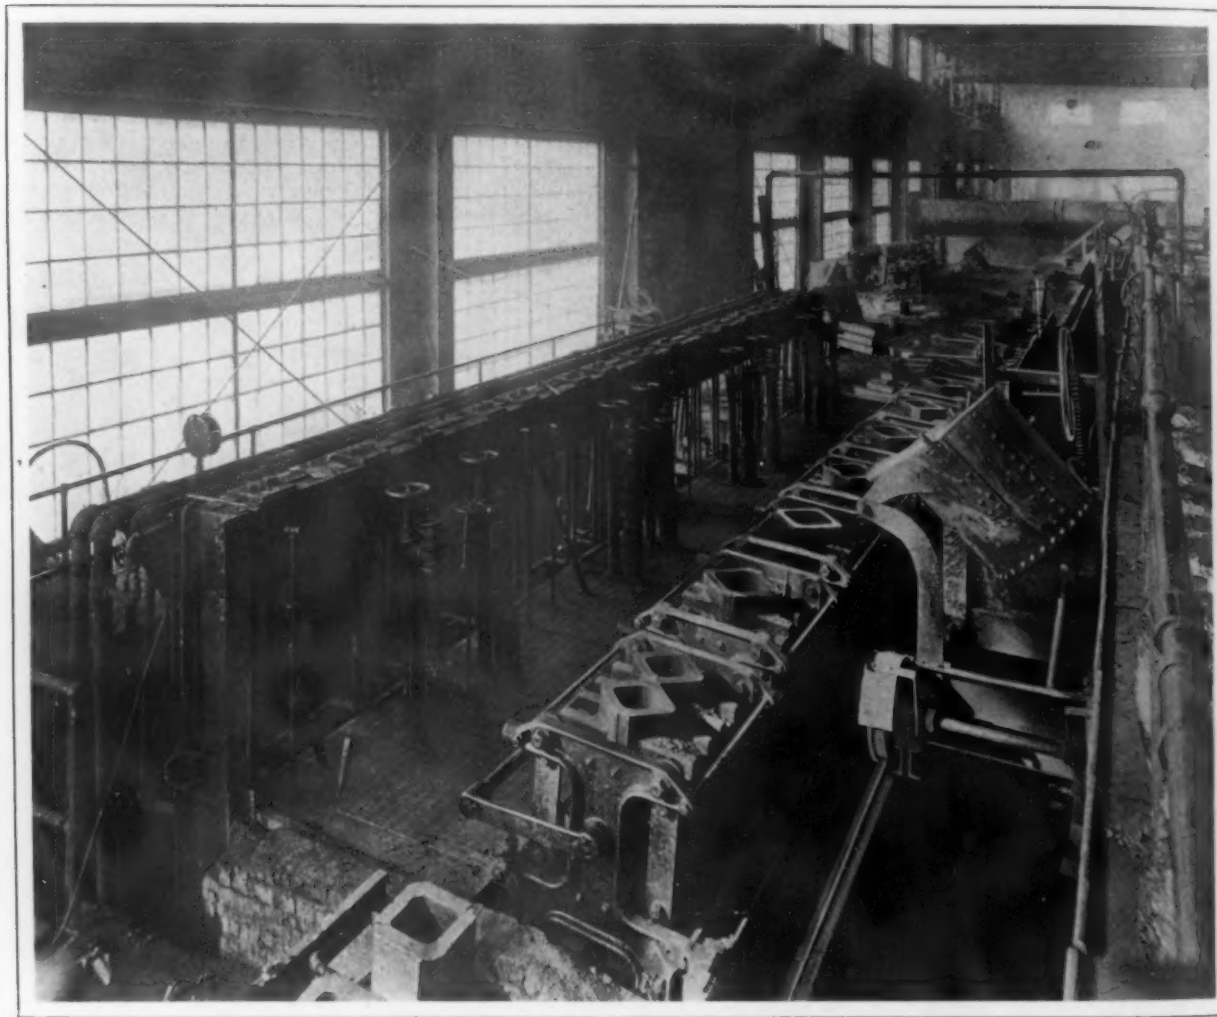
Row of Ingot Molds, the Working Platform and the Valve Control Stands
